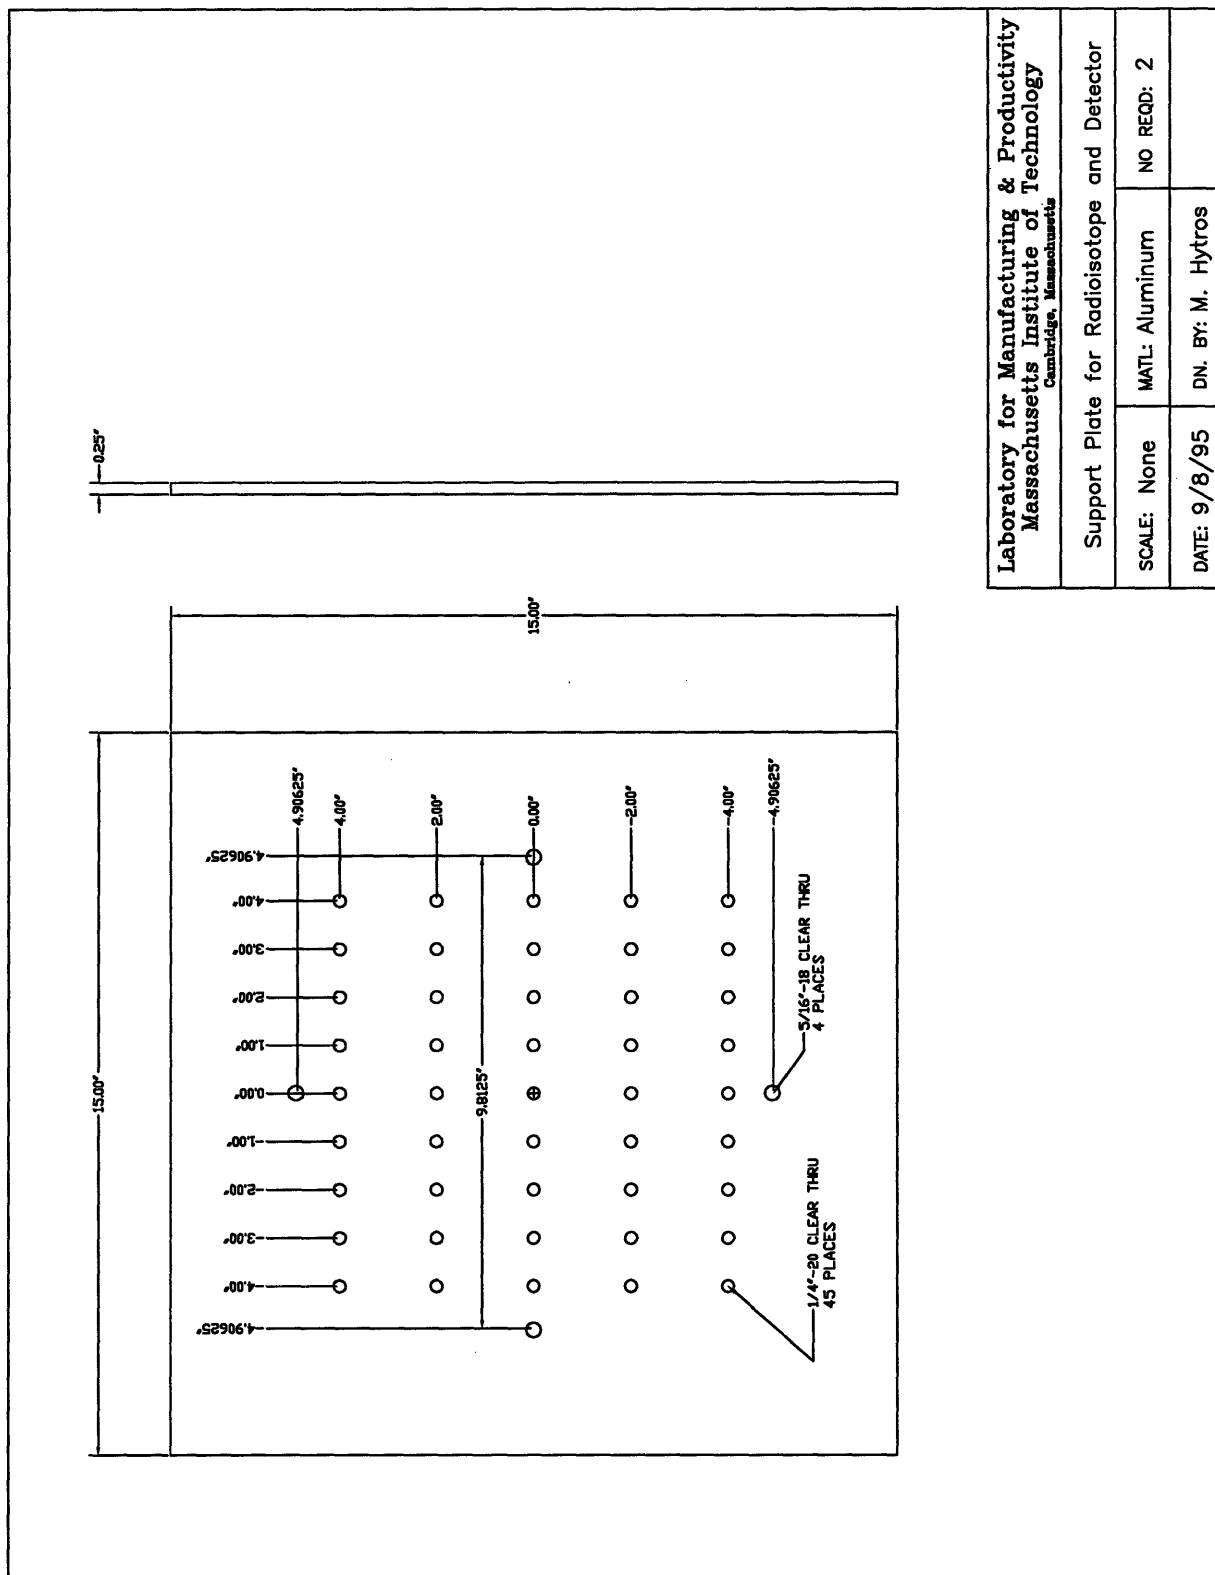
Detail Drawing of Tomographic Table Mount Plate
